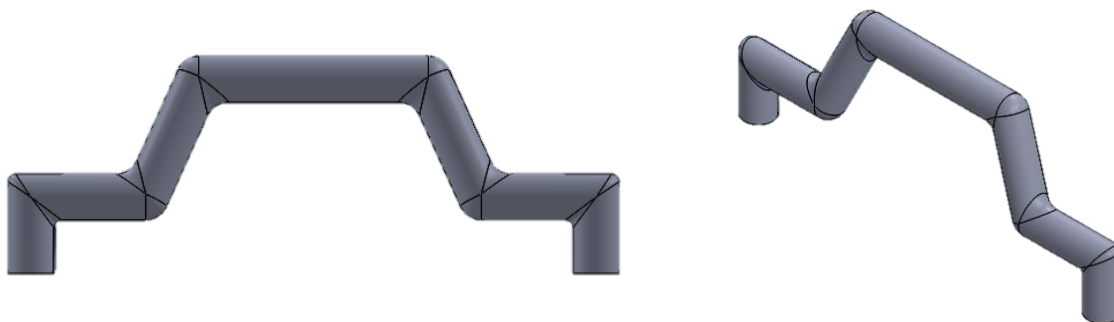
Alternate gripping system, which would've been made of bent or welded aluminum.
